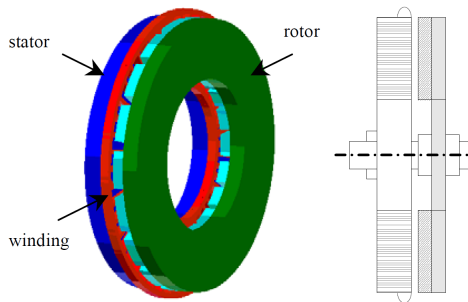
Sketch of an axial flux motor with a single stator – rotor – configuration [14].
